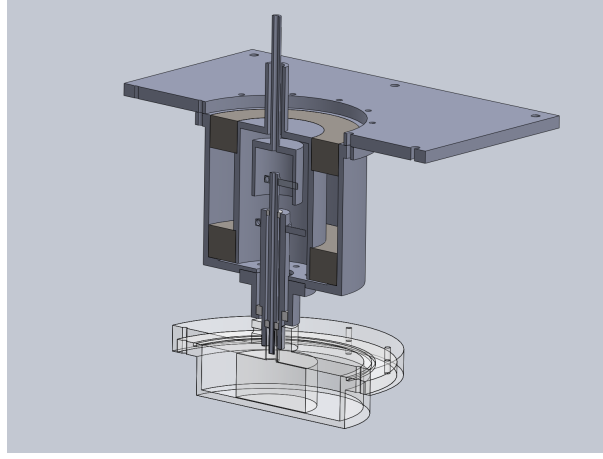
Drawing of proposed new Taylor-Couette cell and mounding assembly. The cell at the bottom would be constructed out of acrylic to be both transparent and index matched to working and cooling fluids. The assembly in gray is the broken axle drive shafts.
